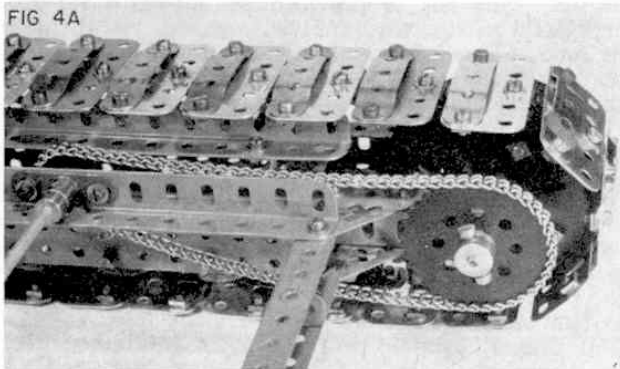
The sprocket chain drive and general track arrangement of the assembly shown in Fig. 4.
